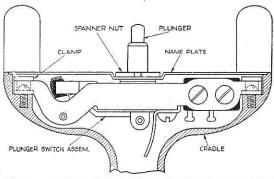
Cross-Sectional View of Monophone Cradle Showing Plunger Switch Assembly
